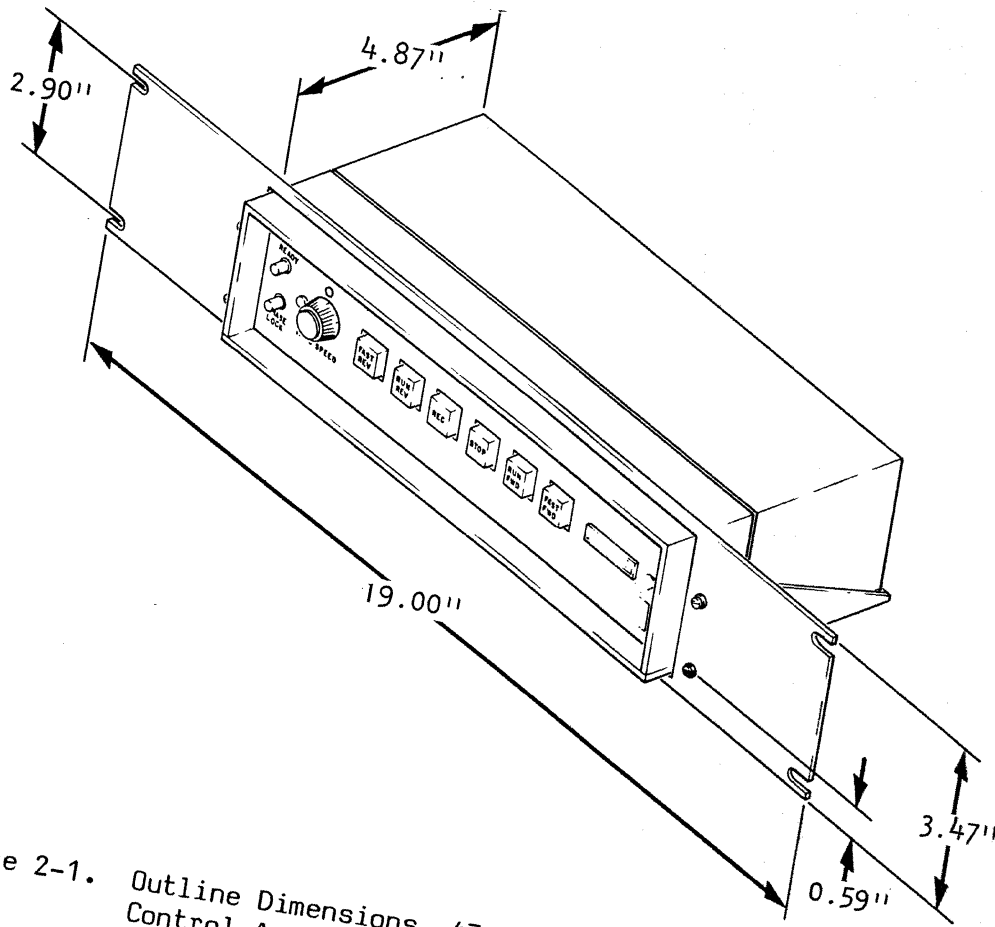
Outline Dimensions, 476562-0003 Rackmounted Remote Control Assembly
